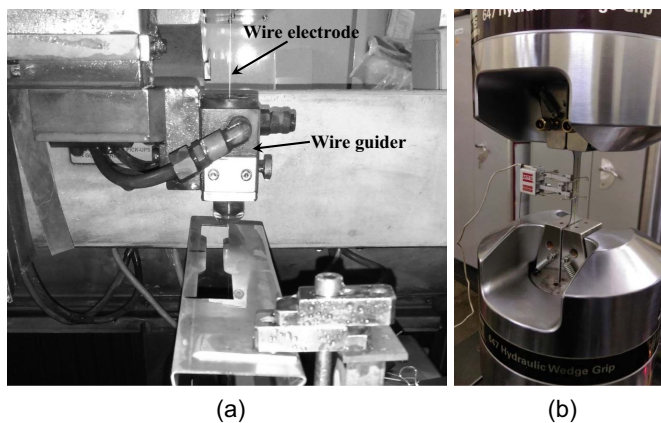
(a) Wire-cutting process for coupon testing; and (b) testing of CFS coupons in universal testing machine.
